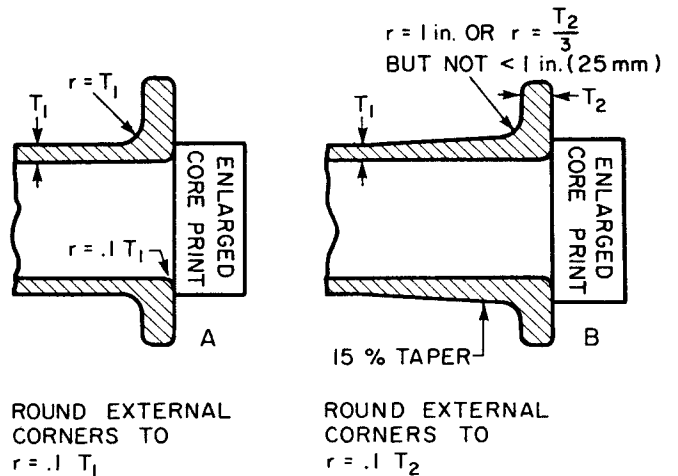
Use of taper and radii to improve internal and surface integrity of fittings.
